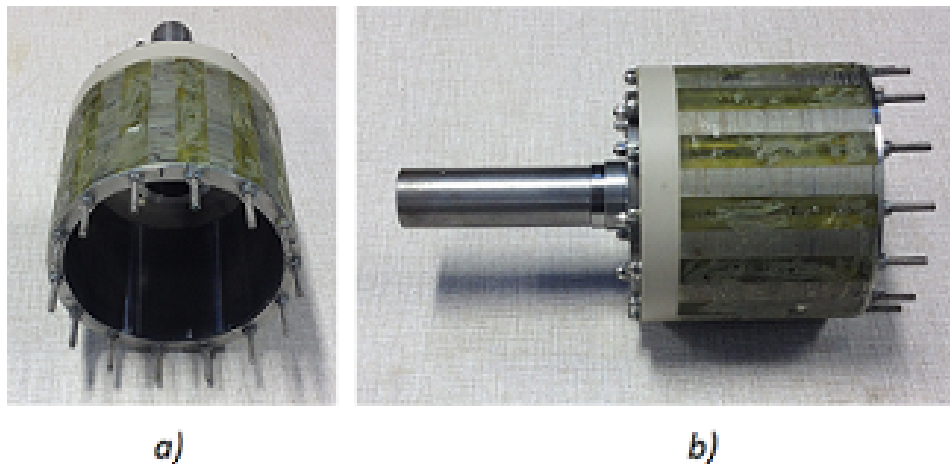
The manufactured LS rotor assembly (a) section view (b) side view
